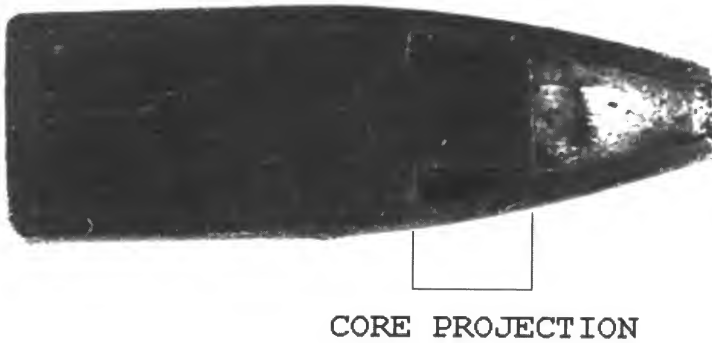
Photograph of a sectioned 270 90 grain HP of recent manufacture used in testing showing the core projection into the nose that is likely to collapse under setback loads.
